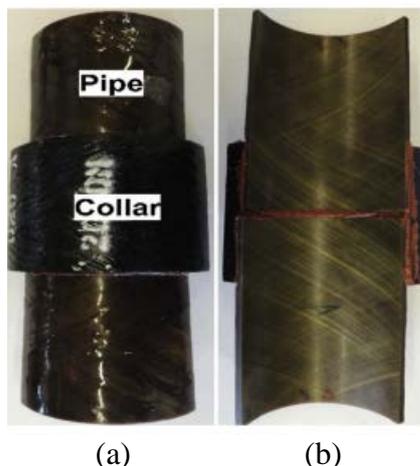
Photography of the adhesive joint (sample 1) viewed from: (a) outside and (b) inside [7].
